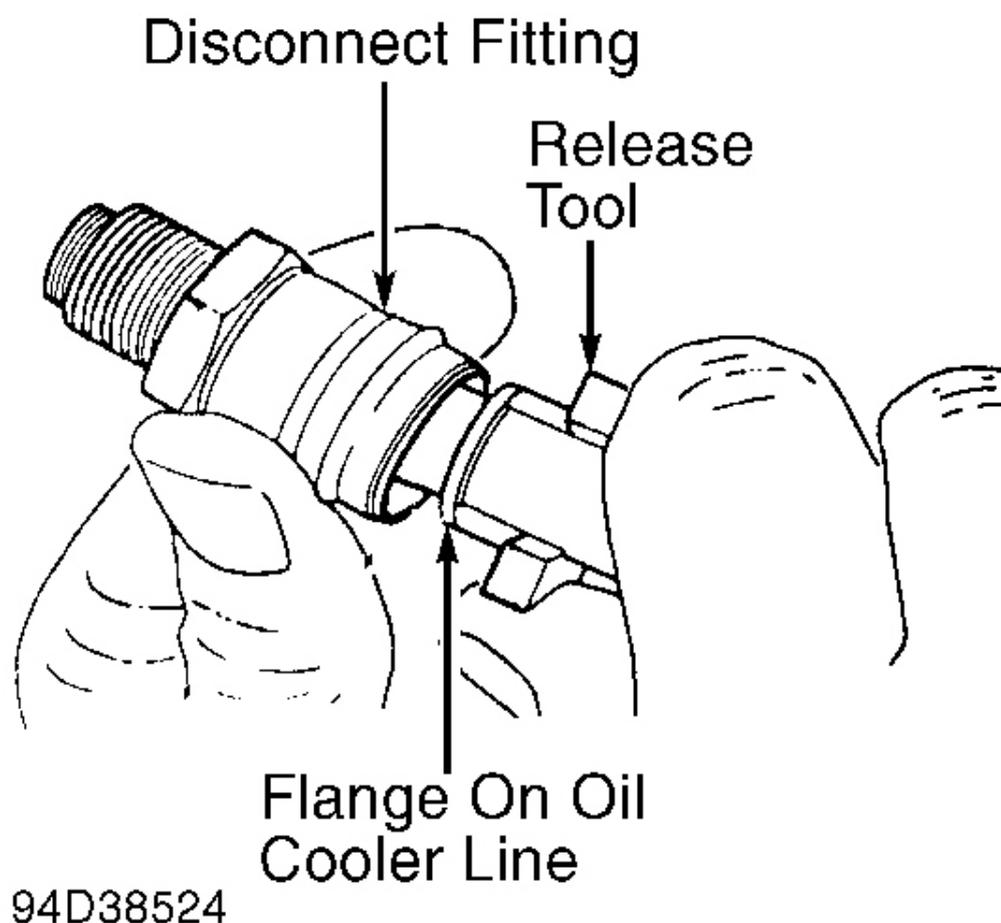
Removing Oil Cooler Line From Disconnect Fitting (Type 2 Shown; Others Are Similar)
